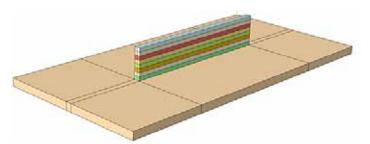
Finite-element model of build plate with color-coded welds.
